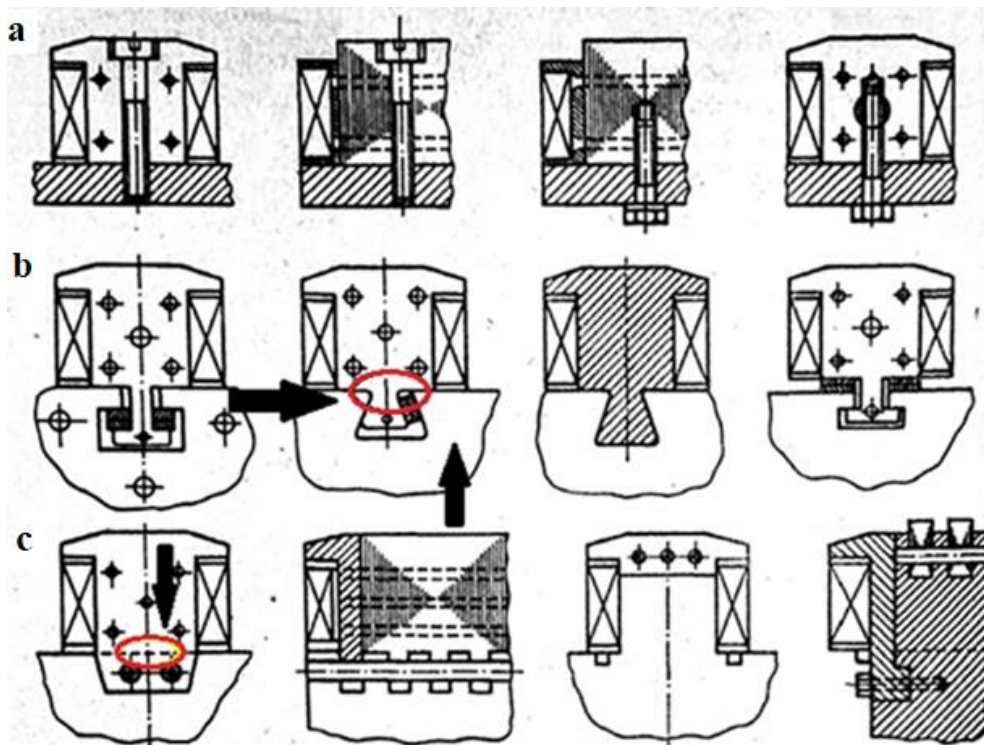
Types of fixing poles to the rotor: a – by bolt (screw); b – with the help of shanks; c – comb-shaped [4].
